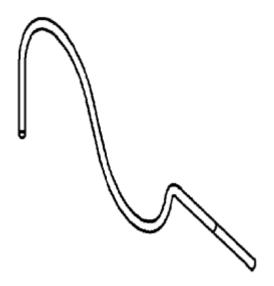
TENSIONER PIN 9703 Courtesy of CHRYSLER LLC
